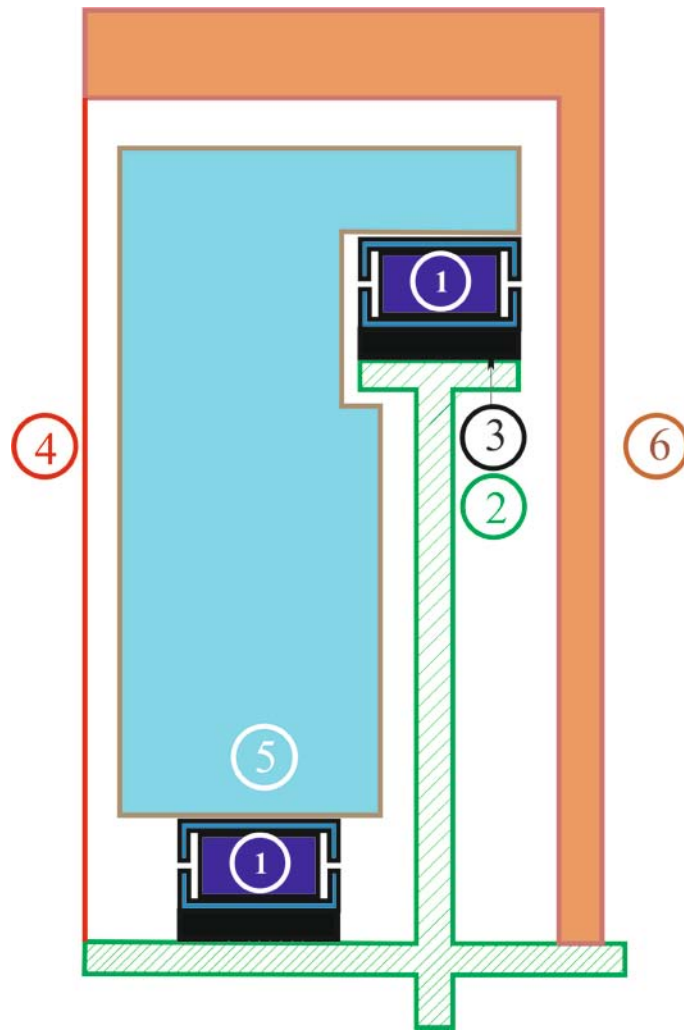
Detail of rotor package: 1 - Roller bearing diameter of the building;
